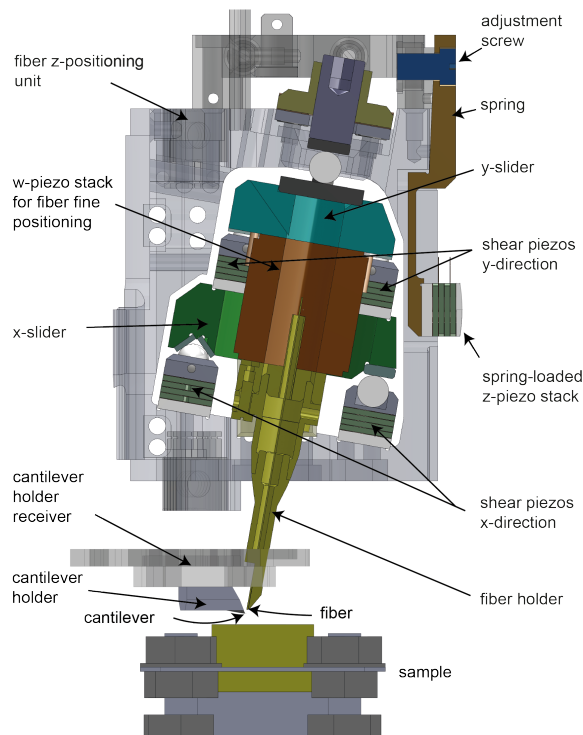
CAD sketch of the fiber z-positioning unit containing the x- and y-positioning unit. The assembly can be placed inside the cylindrical instrument body. After tightening the adjustment screw, the spring-loaded z-shear piezo stack and consequently the z-shear piezo stack attached to z-positioning unit will be pressed towards the sapphire rails on the inside of cylindrical instrument body. The cantilever-to-fiber geometrical configuration is also highlighted. The cantilever and the fiber are tilted by 12° relative to the sample.
